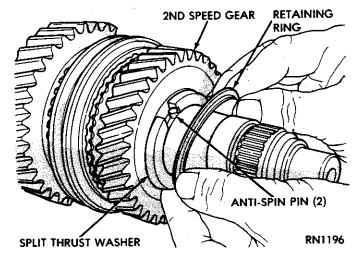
Removing/Installing Split Thrust Washer, Retaining Ring And Anti-Spin Pins
